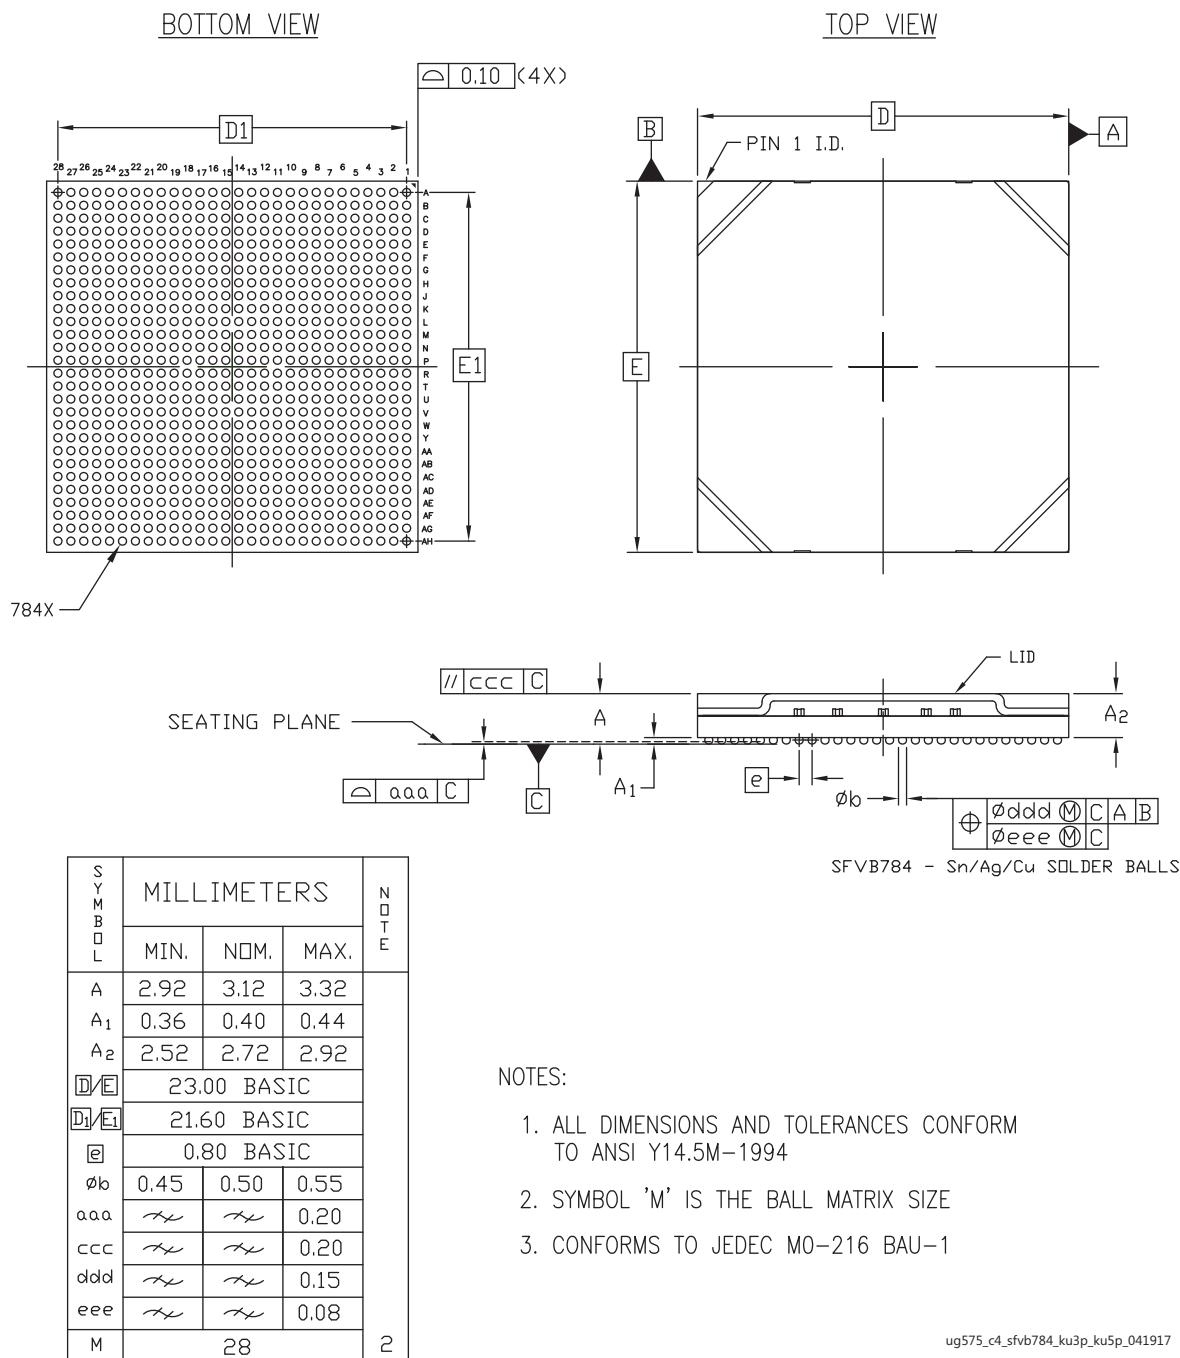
Package Dimensions for SFVB794 (XCKU3P and XCKU5P)
